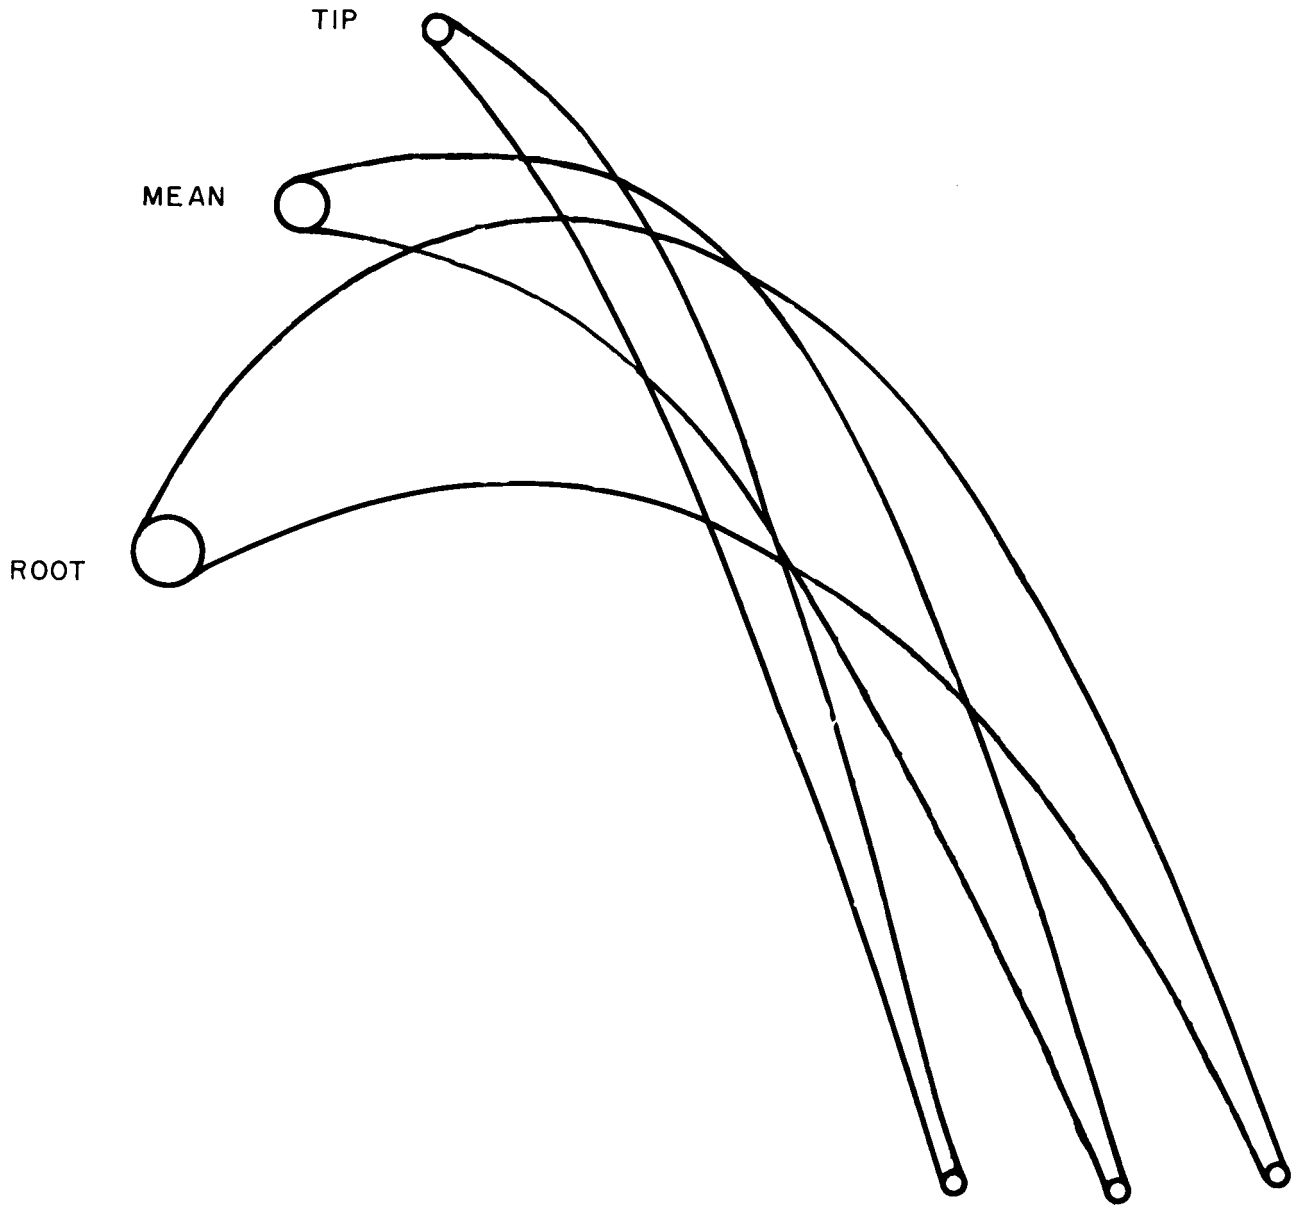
Second-Stage Turbine Blade Airfoil Geometry
